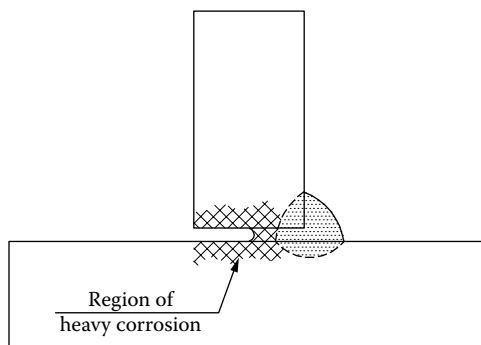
Crevice corrosion of a metal-to-metal welded joint.
